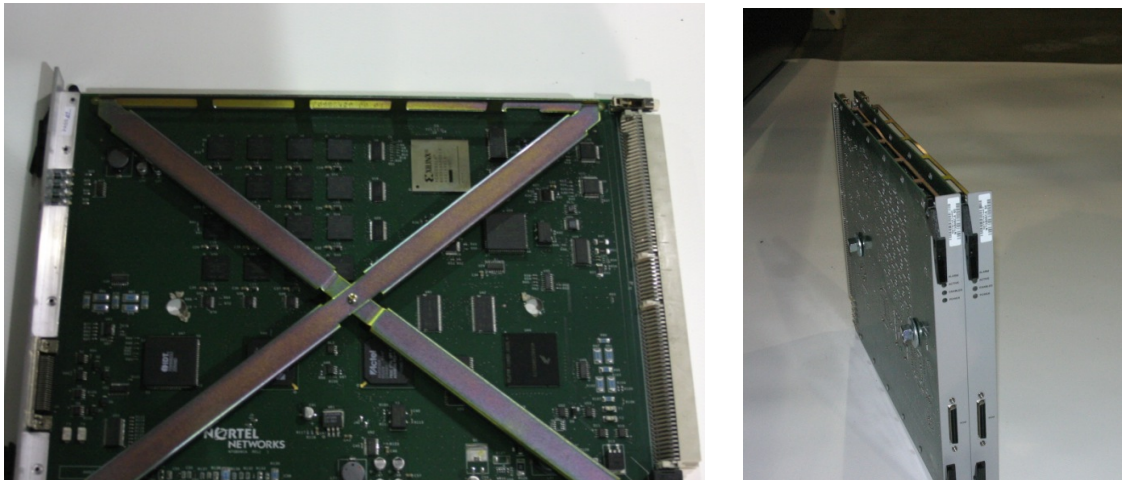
Printed circuit boards; top view (left) and side view of two boards sandwiched together (right).
